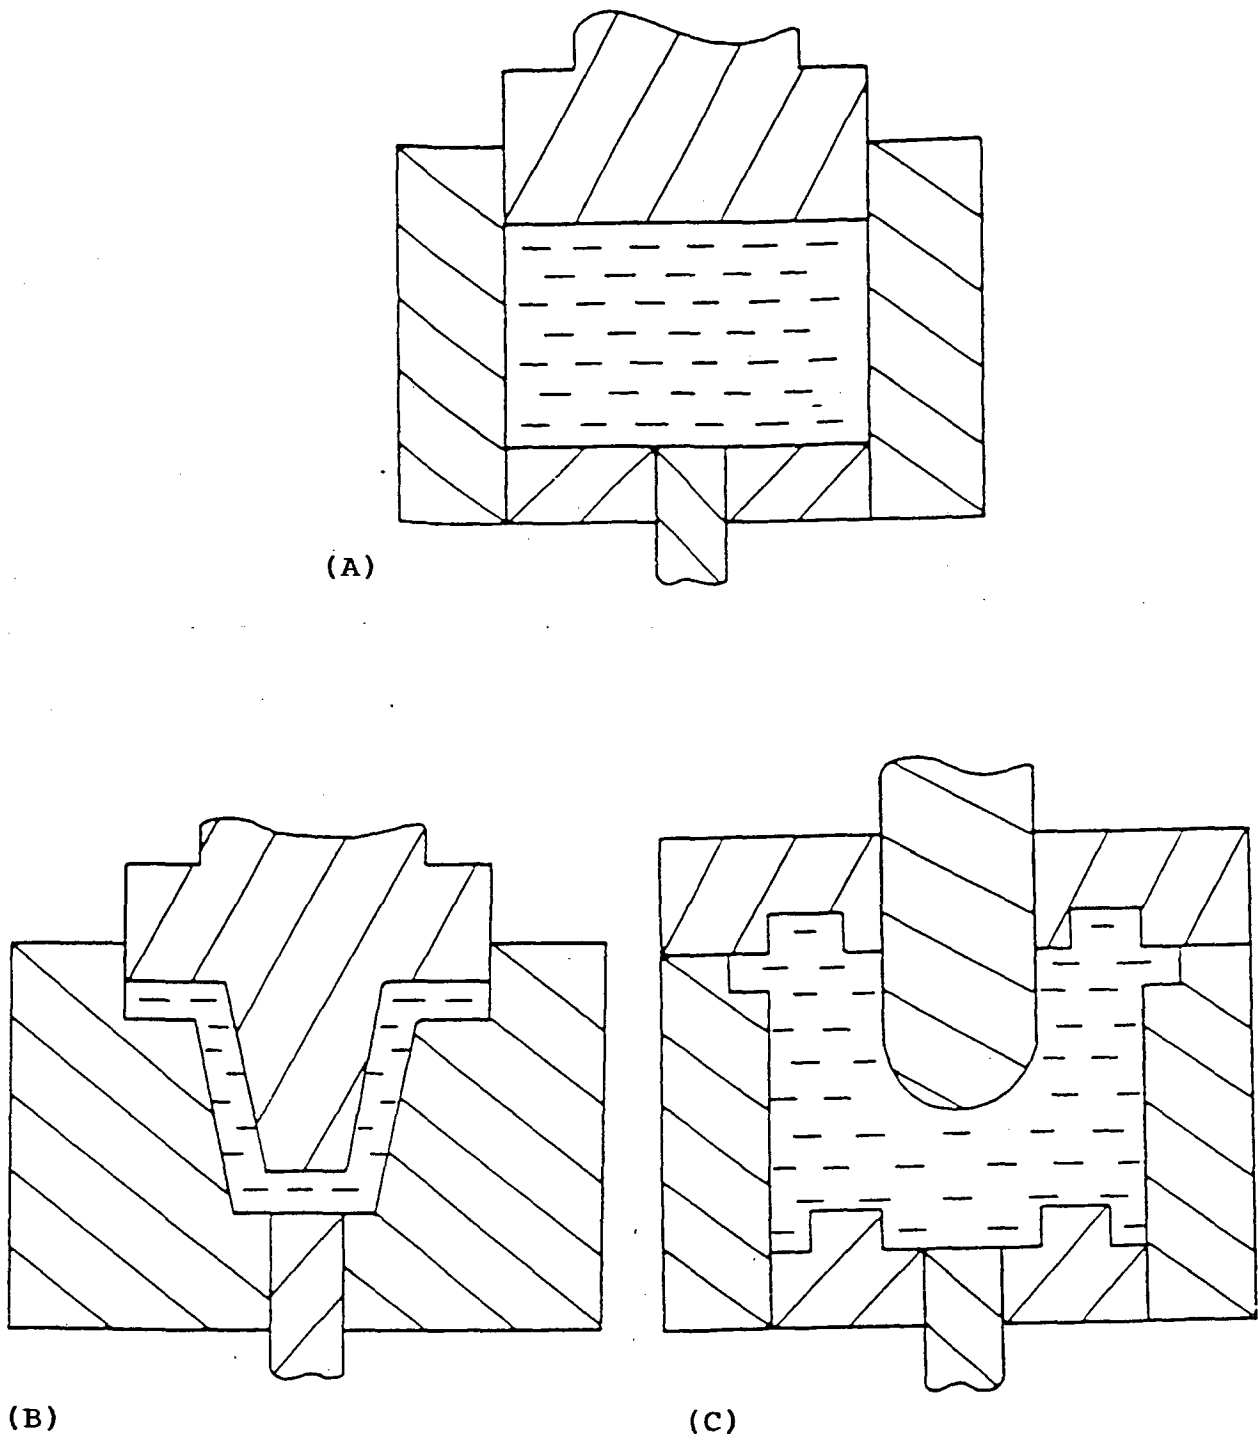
Schematic representation of squeeze casting modes. (A) squeeze casting, (B) Extrusion casting, and, (C) indirect pressure solidification. (Ref.89)
